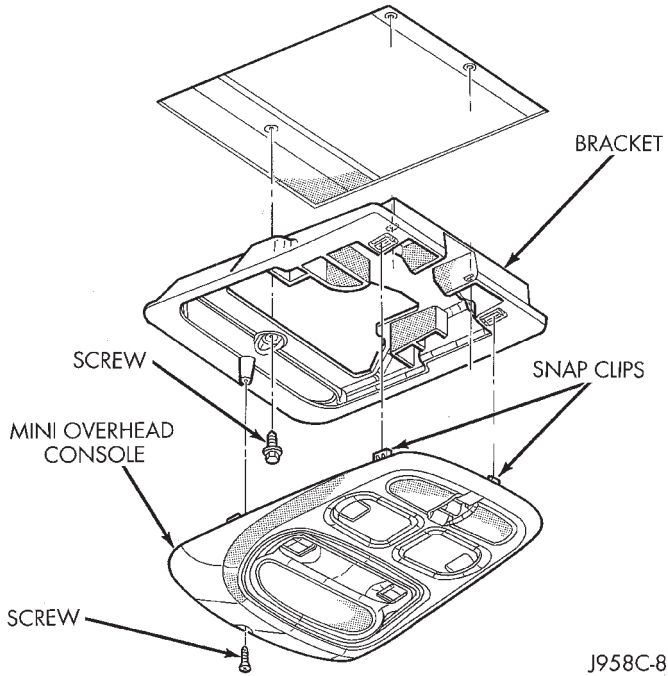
Overhead Console Remove/Install -Short-Type TRIP COMPUTER, COMPASS, AND THERMOMETER DISPLAY MODULE
